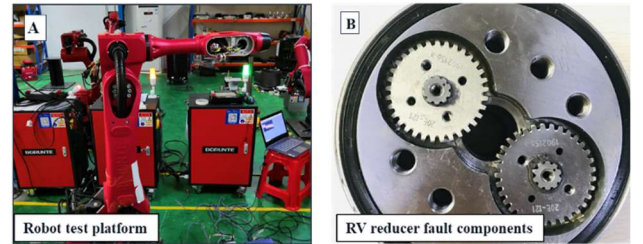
Experimental platform and fault components (A) industrial robot test platform. (B) RV reducer components
